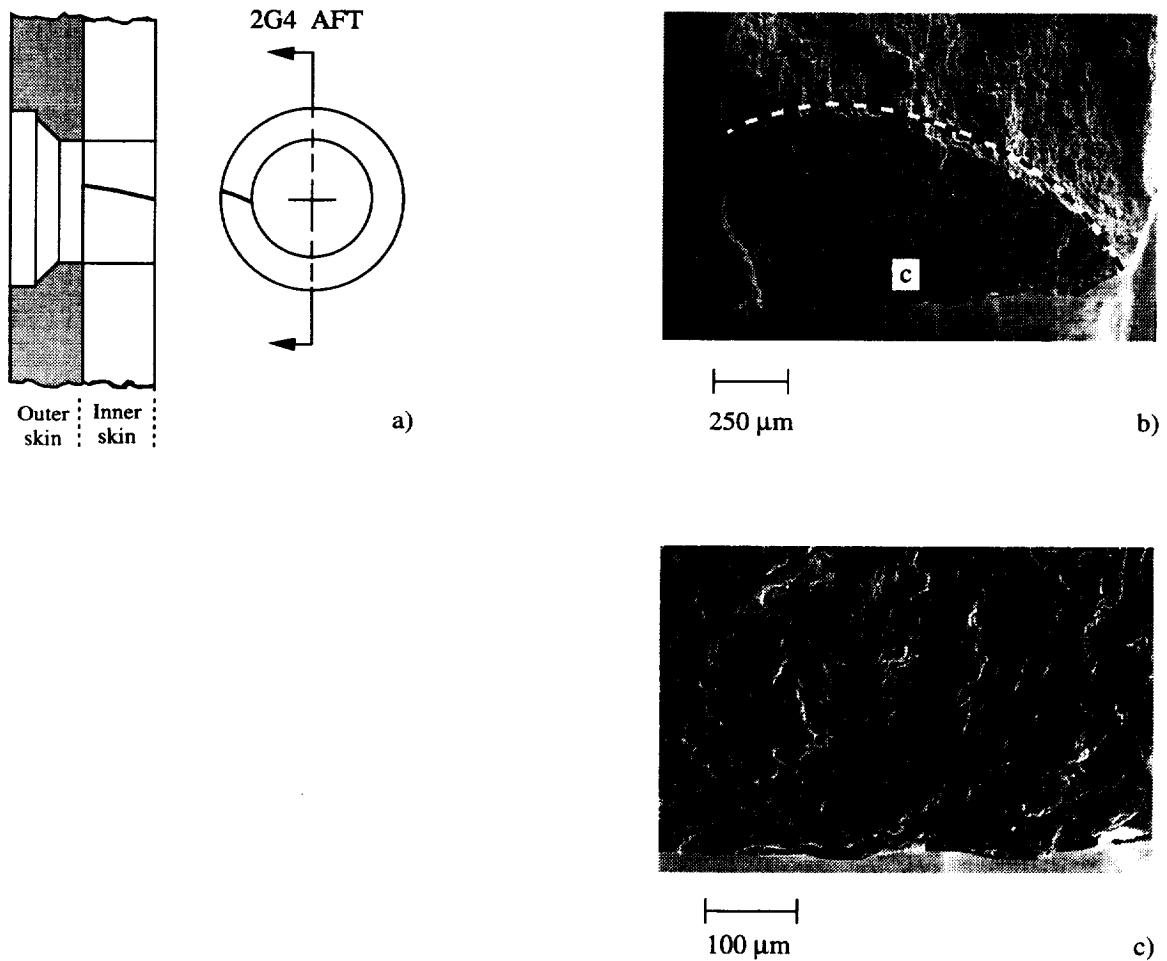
a) The schematic shows the rivet hole 2G4 configuration and the location of the inner skin fatigue crack oriented in the aft direction and about the 9 o'clock position. b) The SEM micrograph shows the fatigue crack fracture surface located along the rivet hole (bottom of micrograph). The fatigue crack extends nearly through the thickness of the inner skin. The dashed line marks the fatigue crack front. c) The SEM micrograph shows the rough surface of the rivet hole and the likely site of crack initiation (region "c" in Figure 7.36.b).
